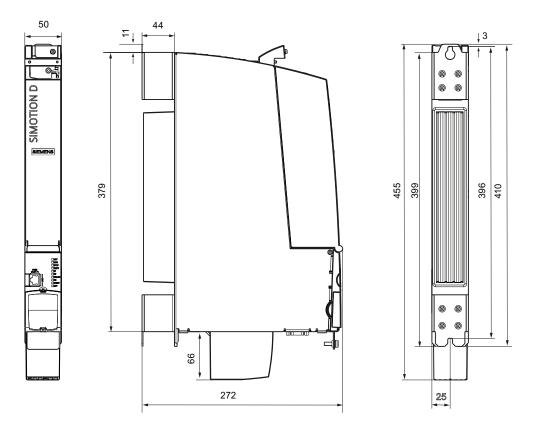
Dimension drawing of D445-2 DP/PN and D455-2 DP/PN
